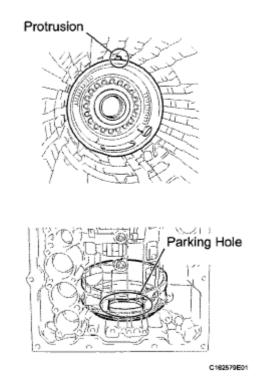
Identifying Piston Protrusion And Parking Hole Of Brake Piston
